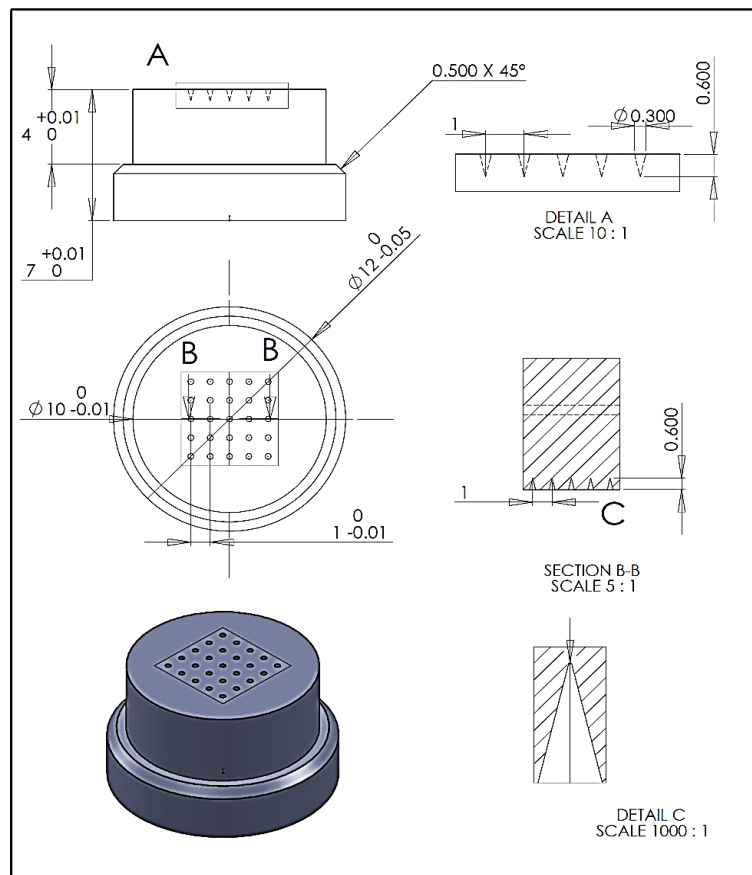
2D drawing of the MN insert with dimension created using Solid-works CAD software.
